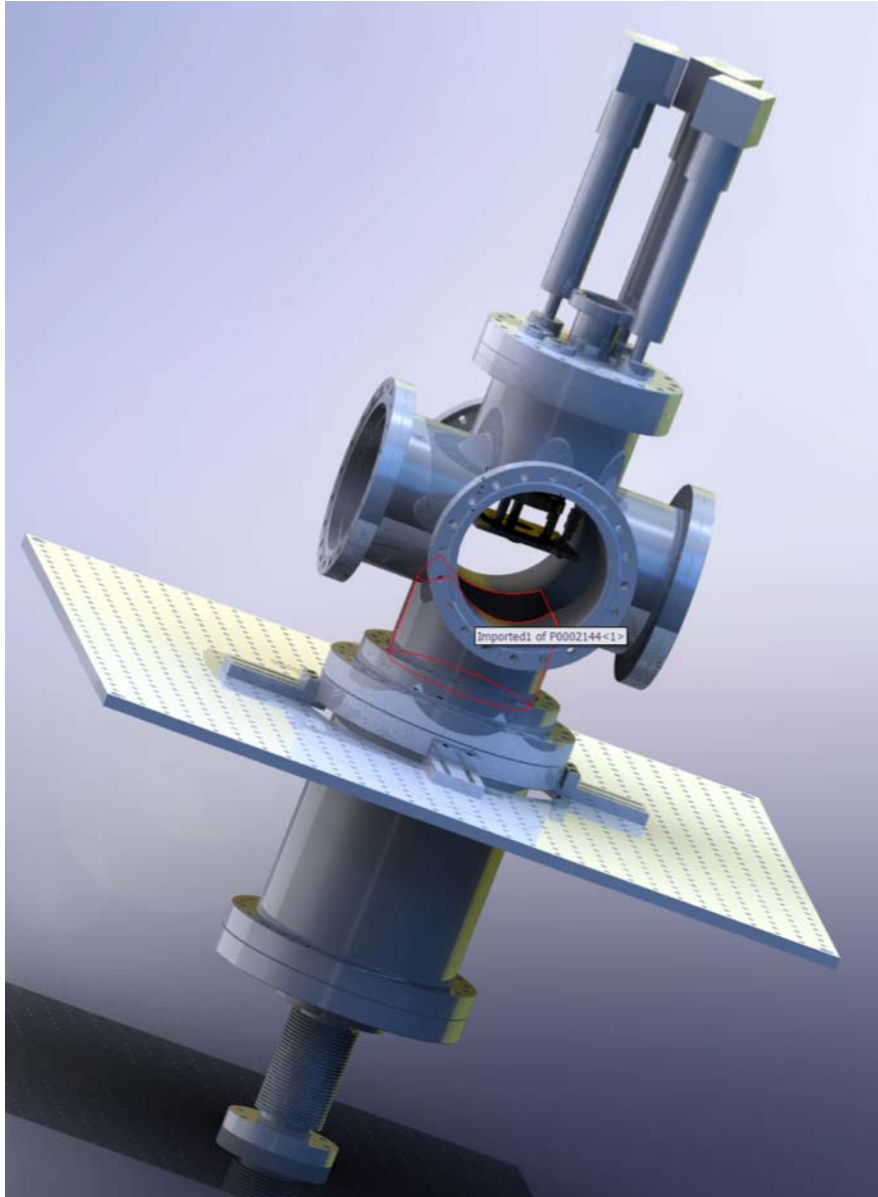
"Smoke Stack" enclosed cathode test cell assembly mounted to the optical table.
